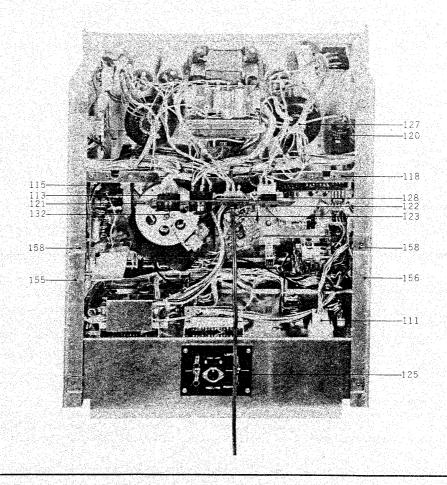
(C) PHOTO OF MECHANISM ASSEMBLY BLOCK
